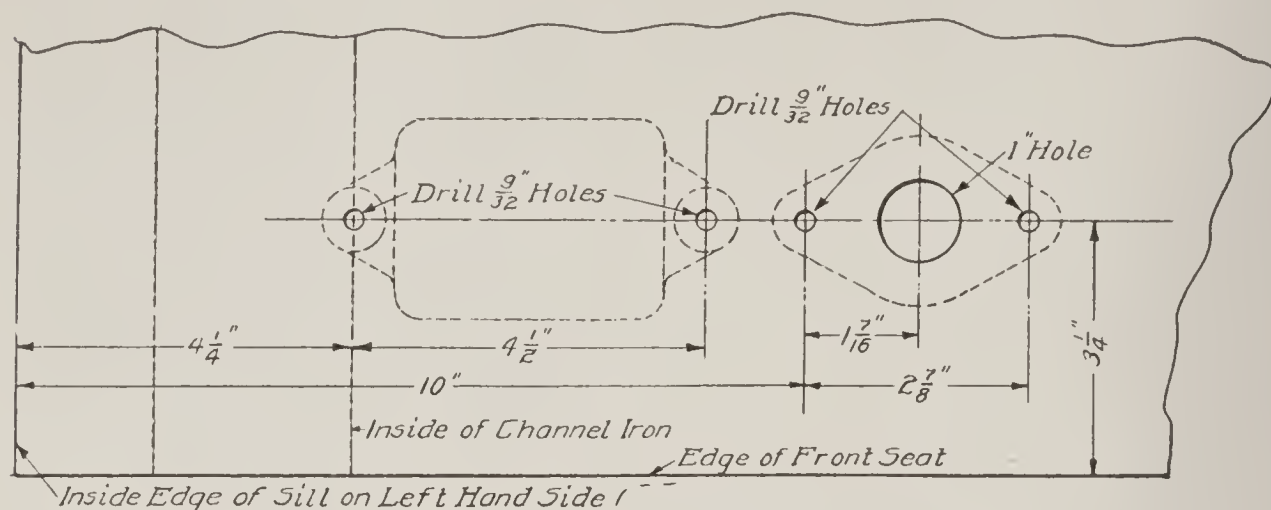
Layout on Under Side of Heel Board for Starting Switch and Cutout
